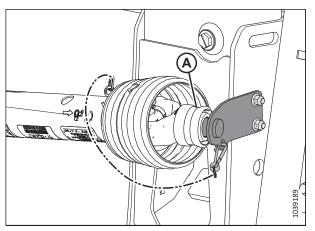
Driveline in Storage Position – Driveline B7038 or B7039
